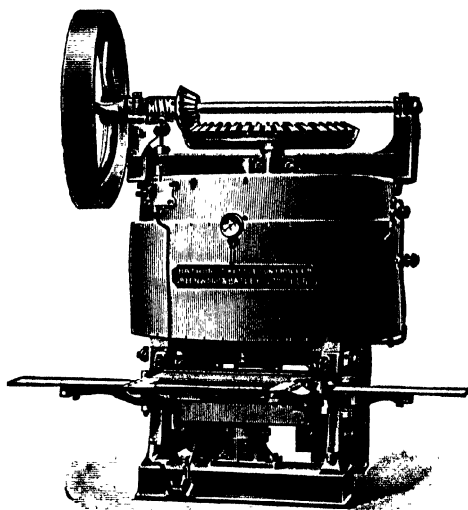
Bathurst kettle controller as applied to the patent self-acting seed kettle and cake-moulding machine.
